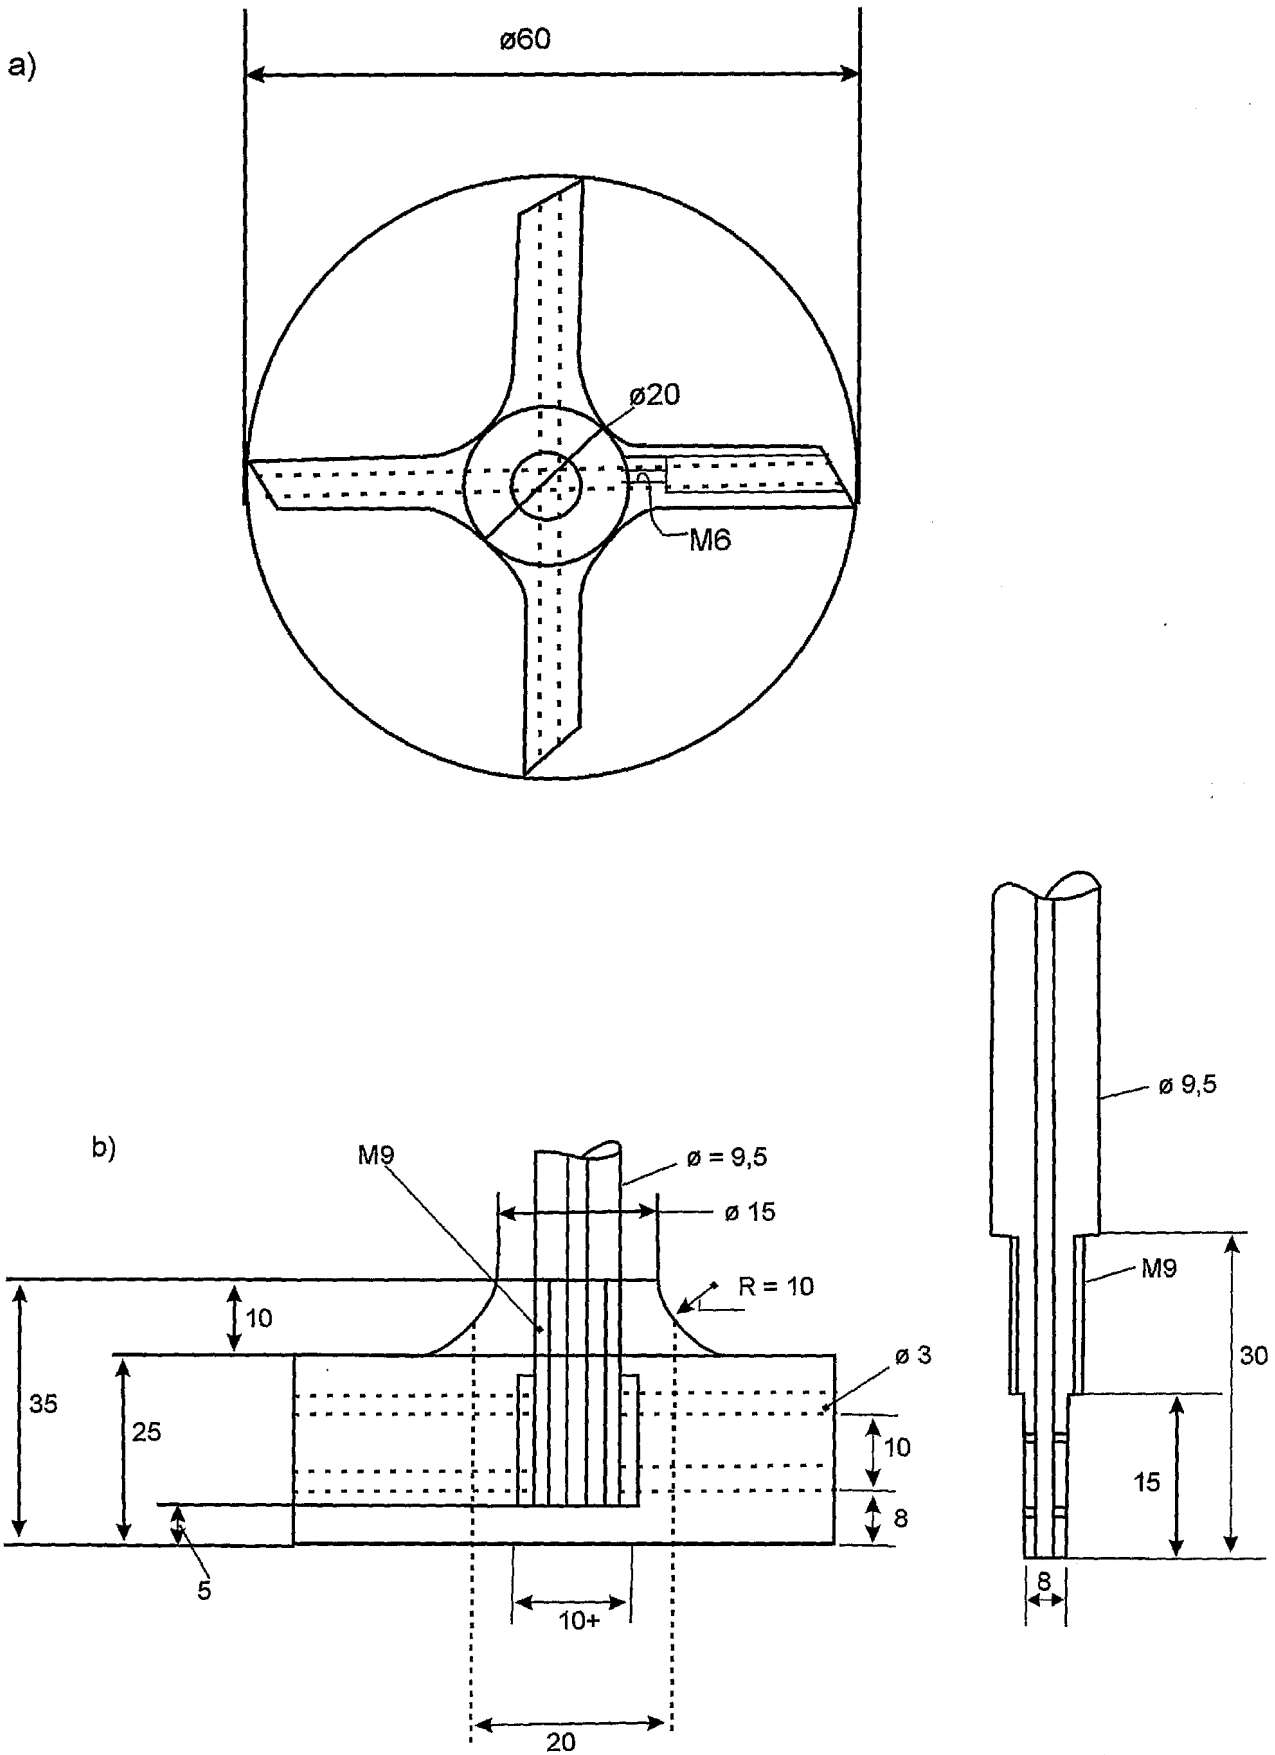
Top view (a) and cross-section view (b) of the agitator impeller
